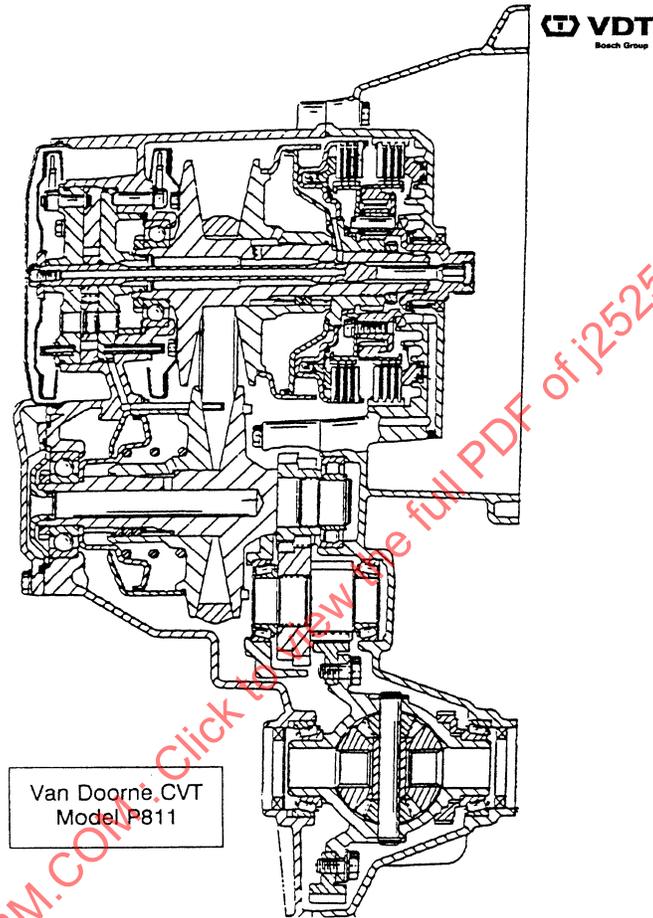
CVT CROSS SECTION—VAN DOORNE CVT MODEL P811
